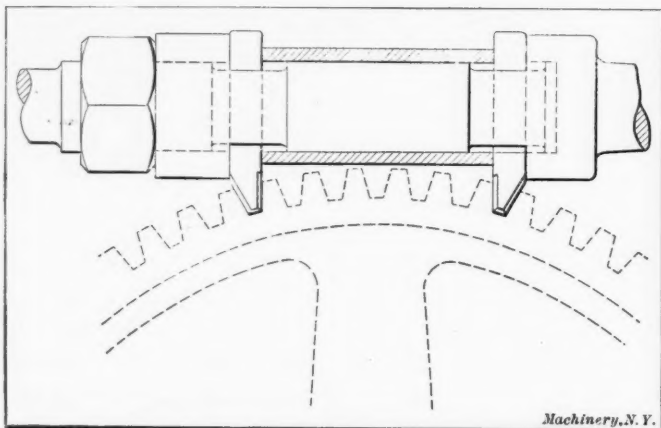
Showing Double Fly-cutter used for Cutting Teeth in Hindley Worm-wheels on S. & S. Hobbing Machine
